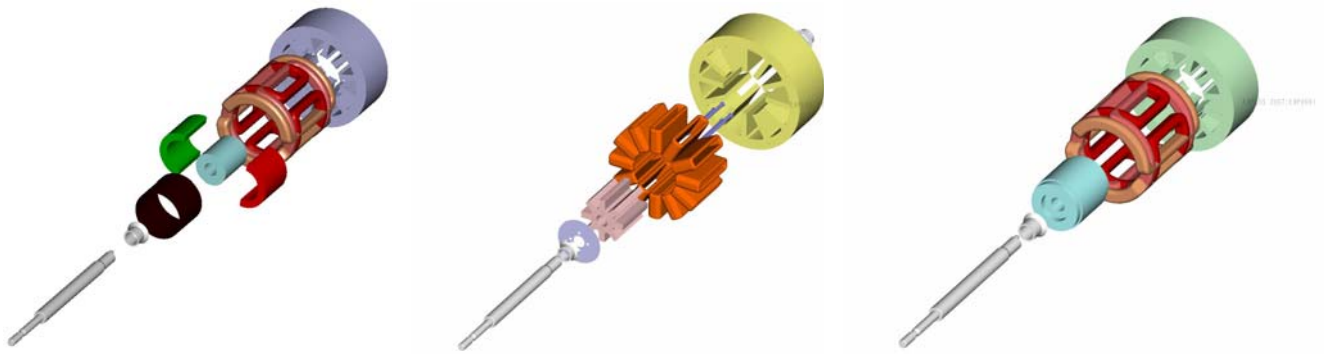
Permanent magnet-excited synchronous machine (SYM), reluctance machine (switched reluctance machine, SRM), asynchronous machine (ASM).
